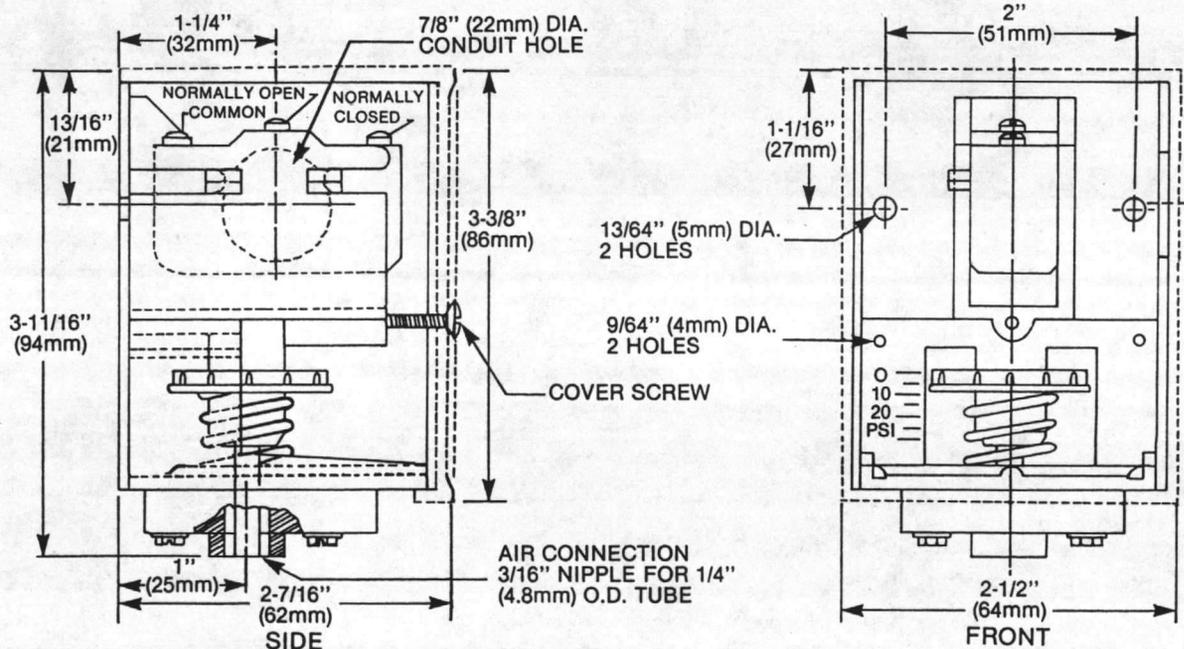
TYPICAL RELAY APPEARANCE AND DIMENSIONS (R471 SHOWN).
